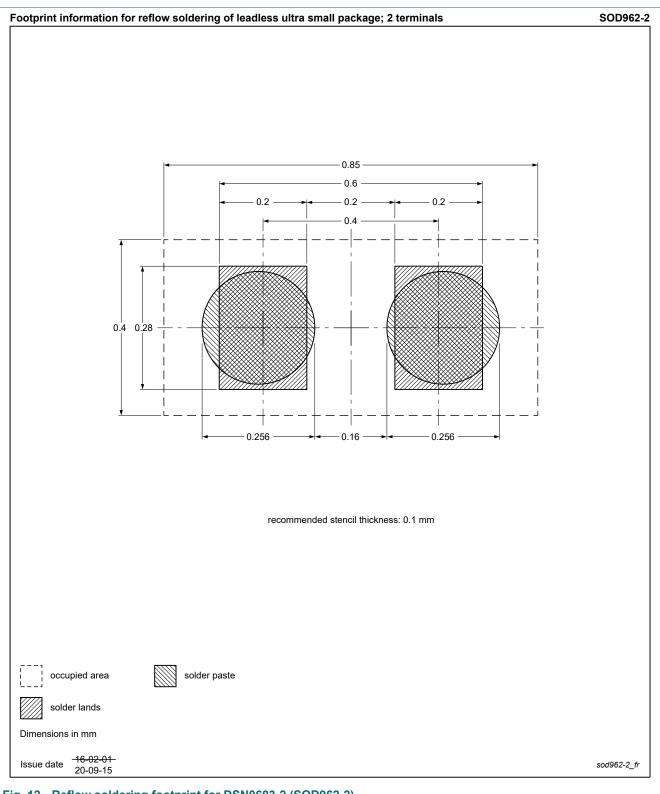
Reflow soldering footprint for DSN0603-2 (SOD962-2)
